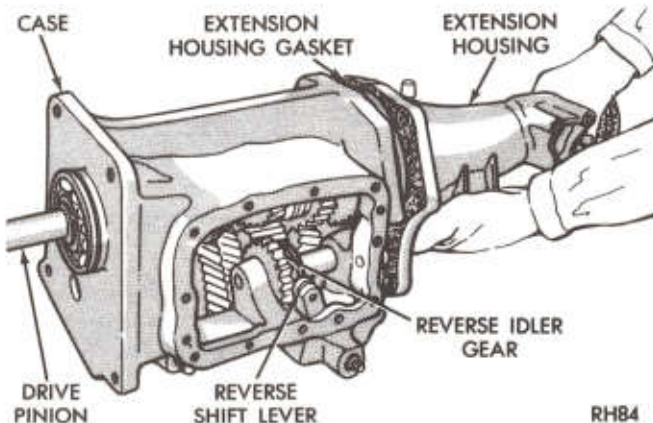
Remove or Install Extension Housing and Mainshaft Assembly
